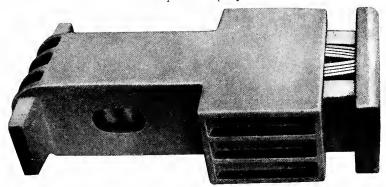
Gould Friction Draft Gear for Passenger Train Cars. Gould Coupler Company.
